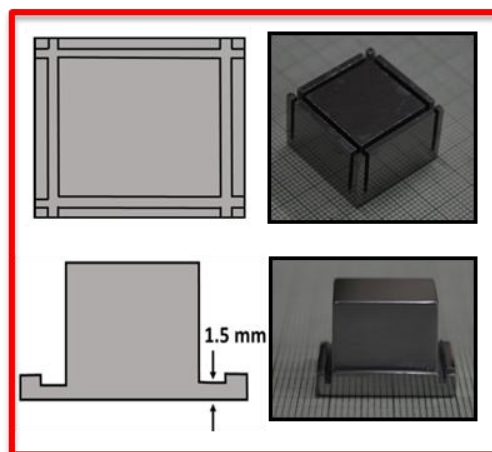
Cross-sectional view and actual shaped 16 mm thick Top-hat crystal.
